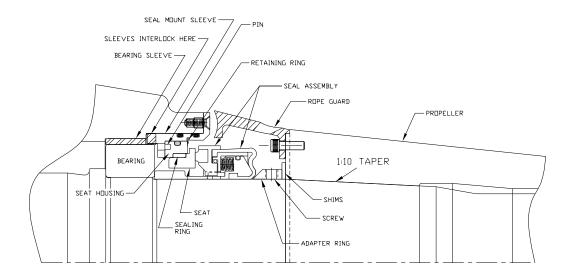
Seal Arrangement for Drive Assemblies 1020764, 1021360, and similar drives having mechanical seal mounted directly on the shaft
